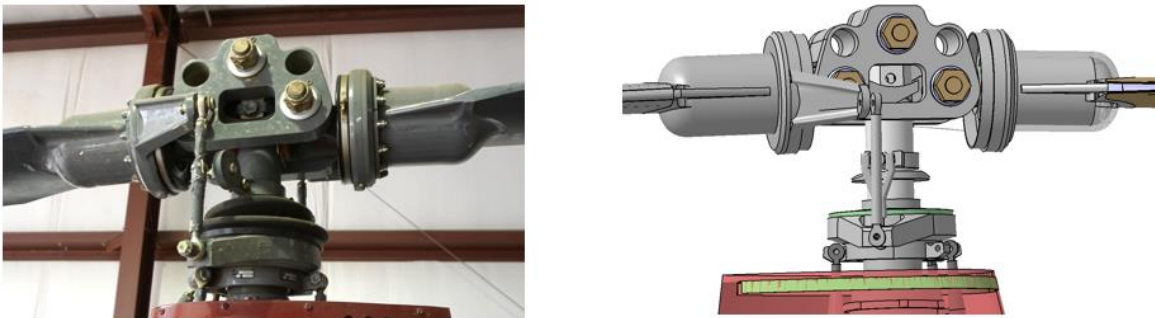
Part 27 Rotorcraft main rotor blade connection to the engine mast assembly.
